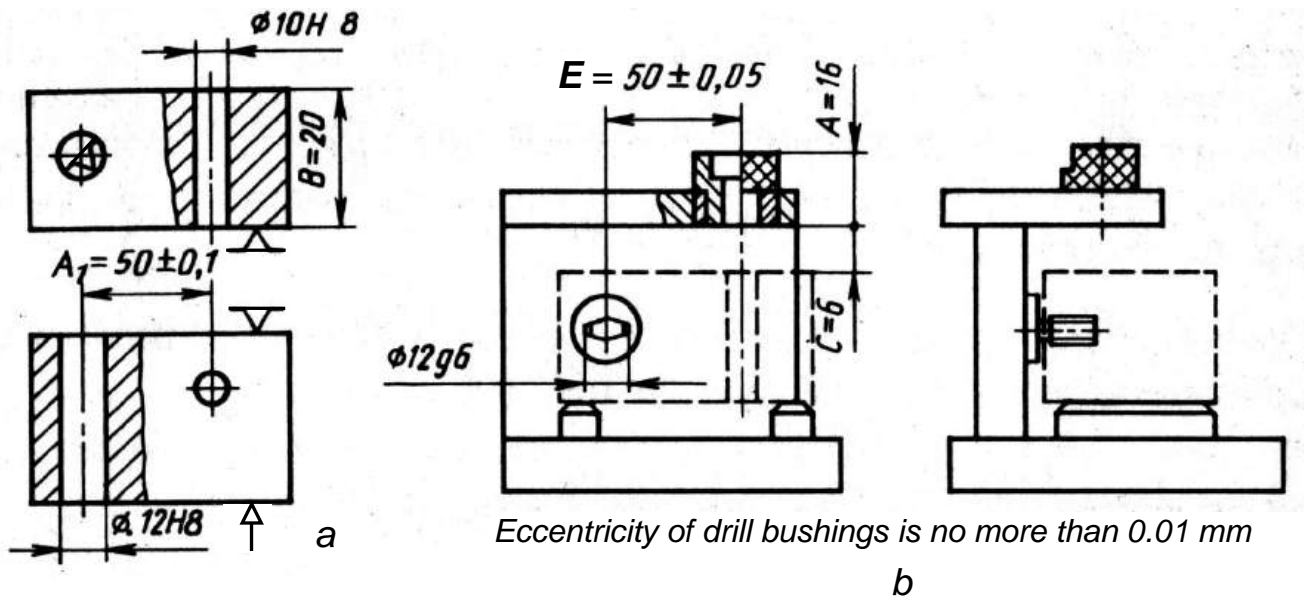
Diagrams for calculations of the drill jig accuracy at machining the hole  $\text{Ø}10H8$  in workpiece: *a* – workpiece sketch; *b* – workholding device
